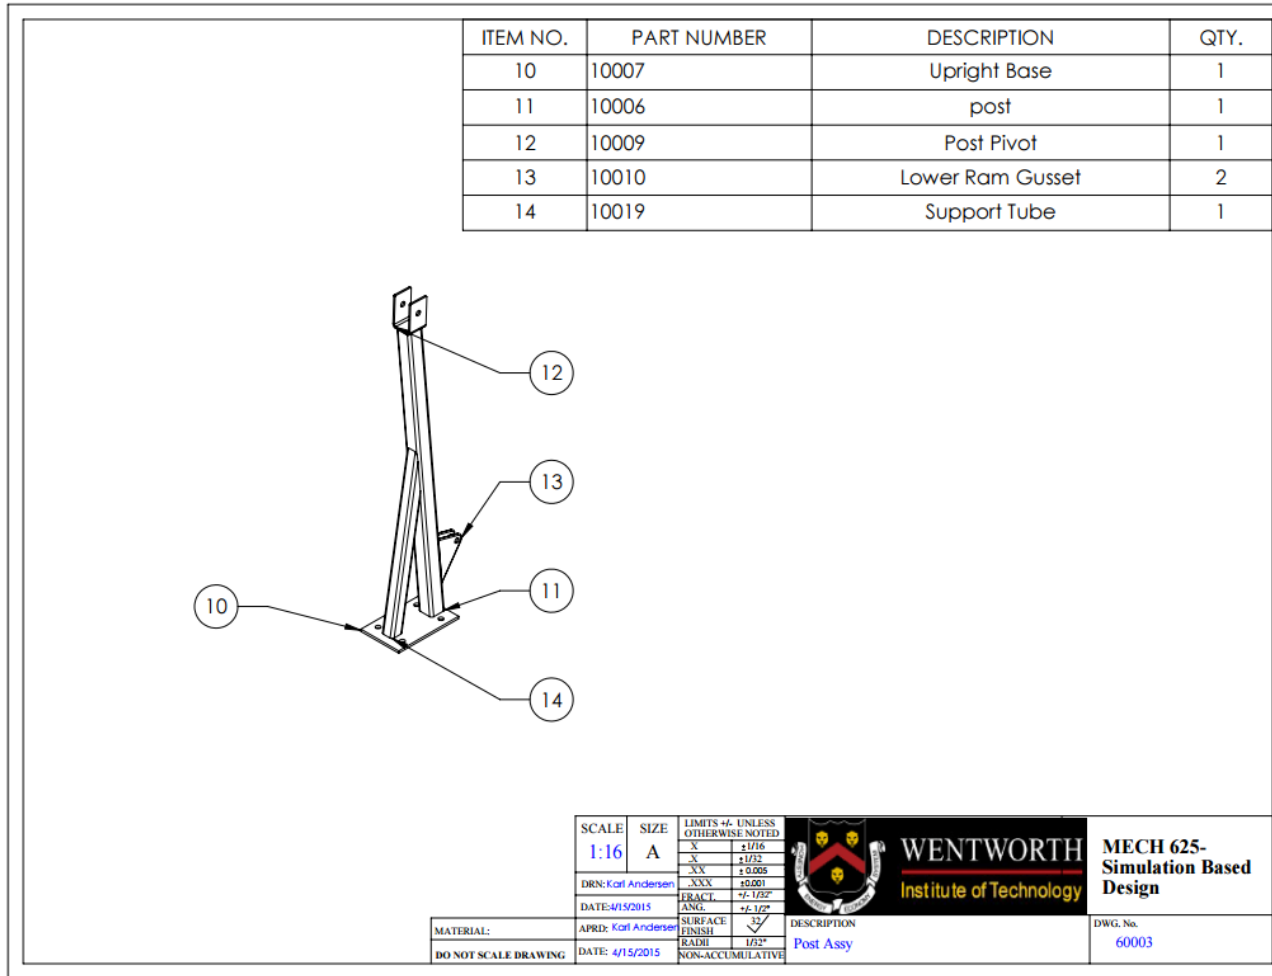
PN#60003 Post Assembly Redesign Drawing with BOM
